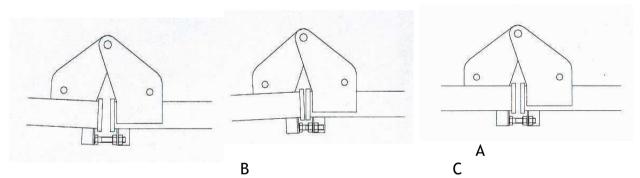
Adjusting the side frame level: A - bolt unscrewed too far, B - bolt screwed too far, C - optimum bolt setting.
